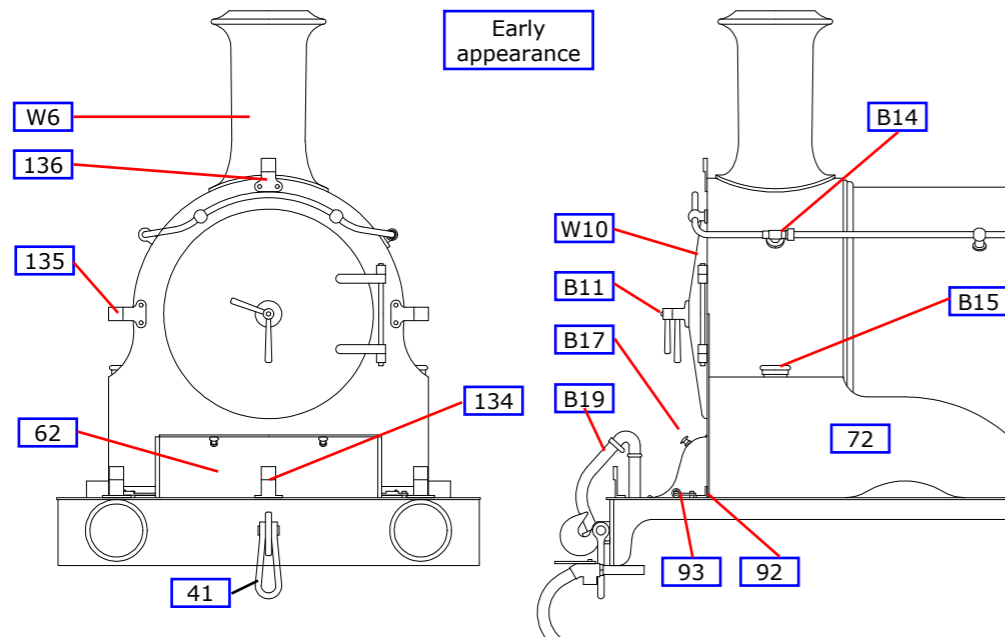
Short frames, sandboxes combined with splashers, front boiler hand rail knob in rearmost position
